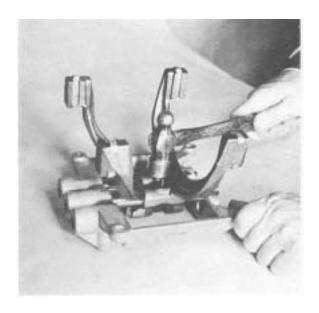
Install 2nd & 3rd shift fork to shift rod roll pin. Move rod to neutral.
